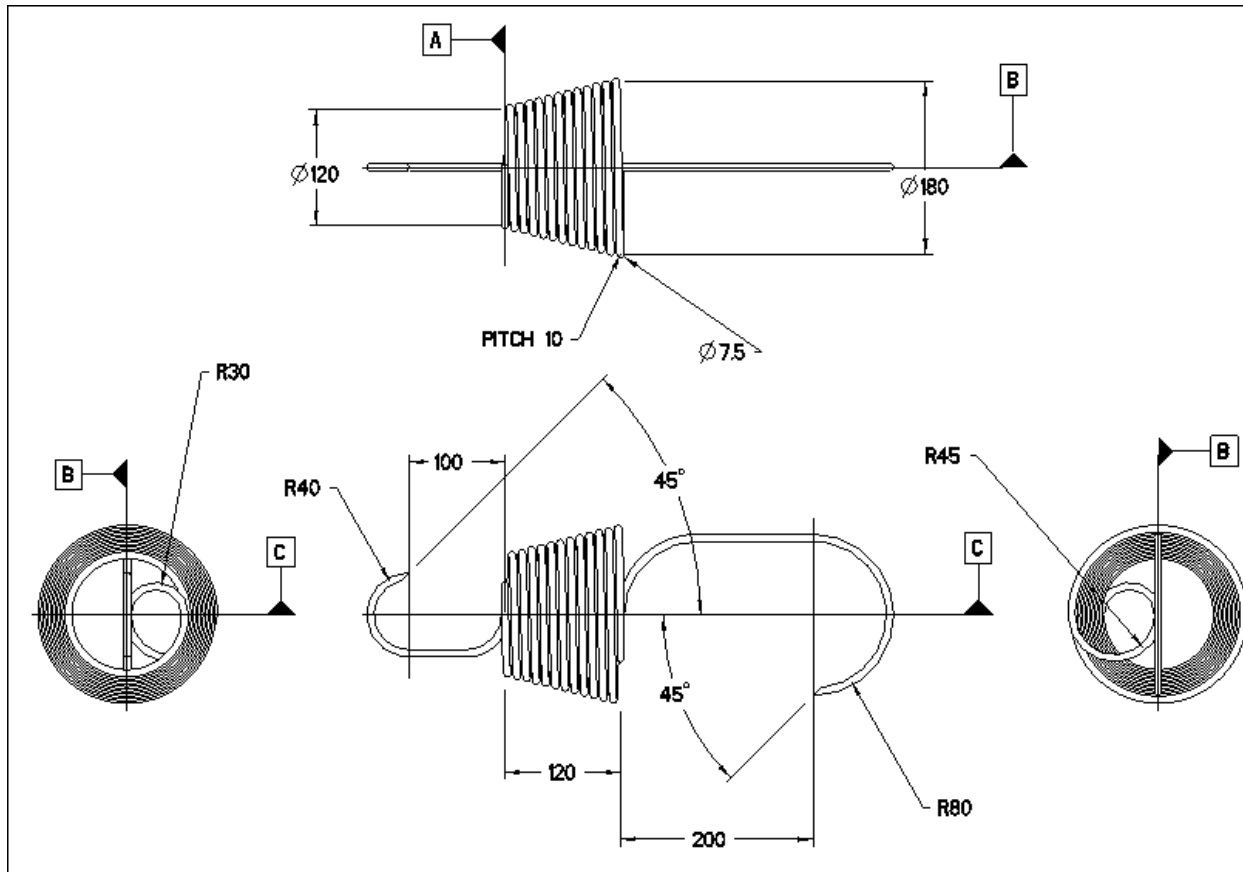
(b) Detail Drawing of Helical Extension Spring with Machine Hook Ends
